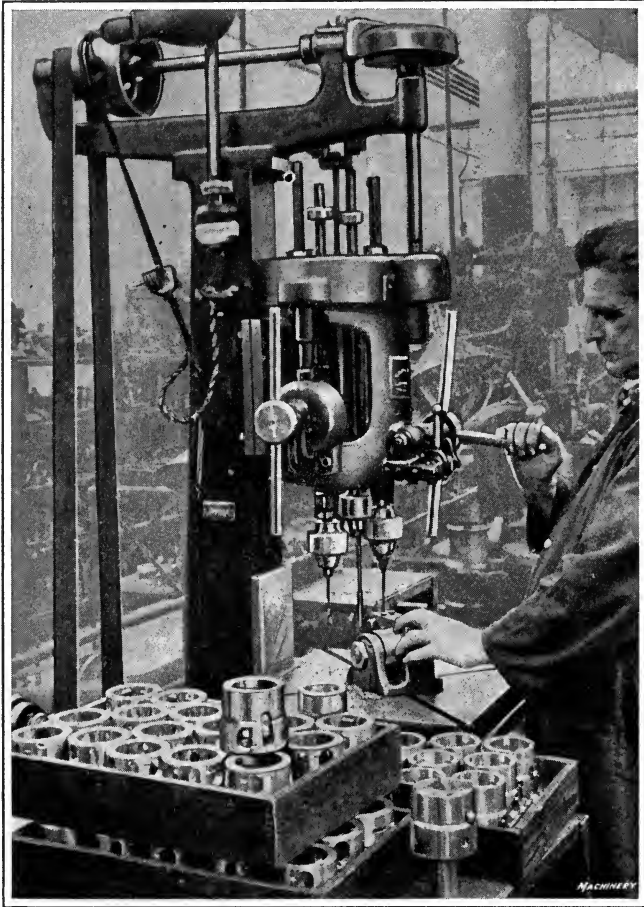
Turret Type of Drilling Machine in which Turret revolves in Horizontal Plane
